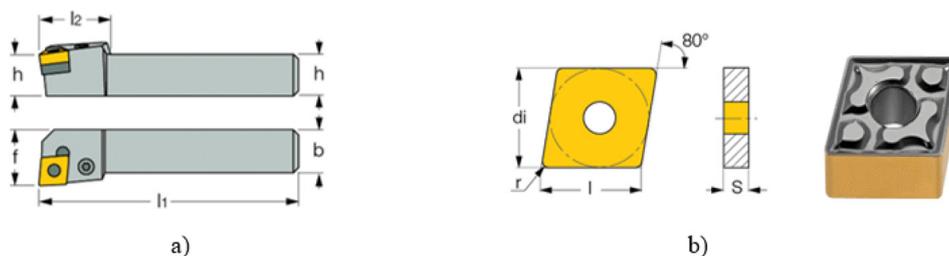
a) Tool holder PCLNR 2525 12A, b) cutting insert CNMG 120408 NN
